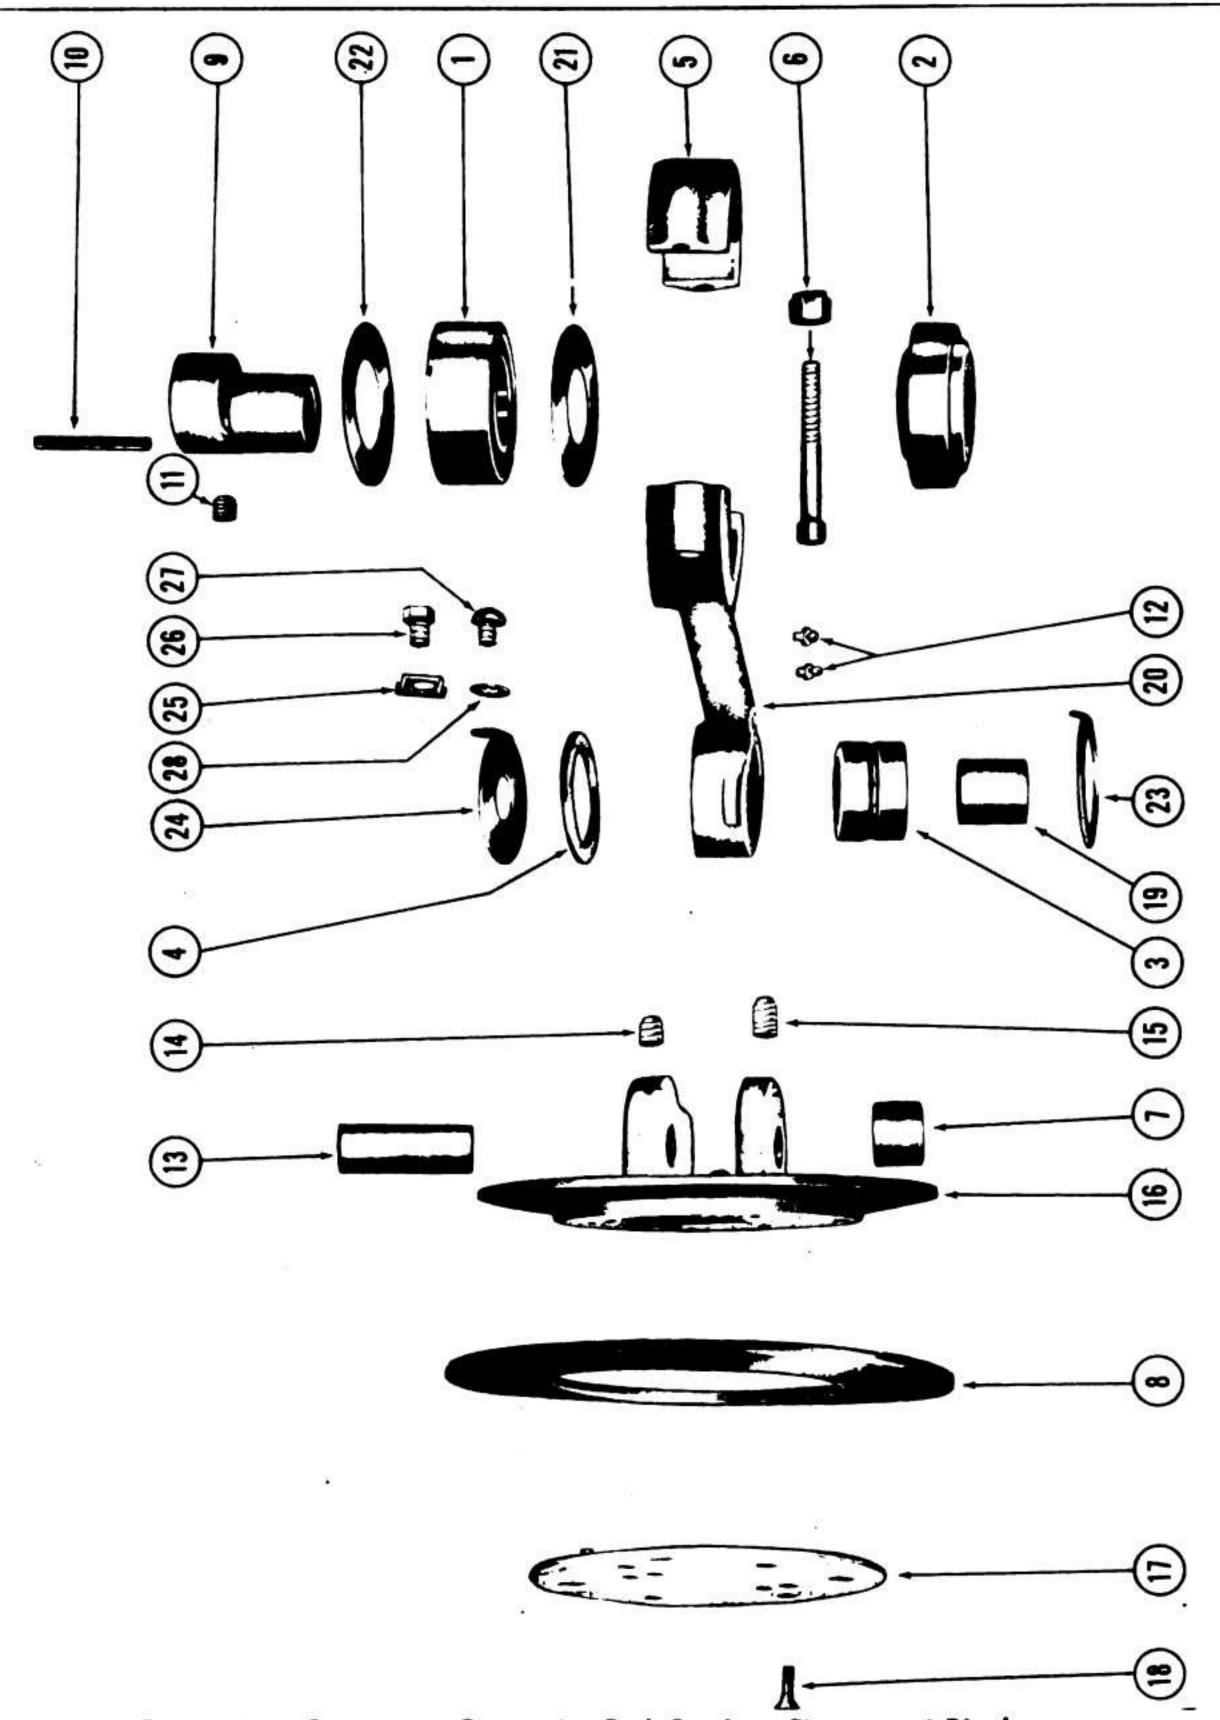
Compressor Connecting Rod, Bearings, Pistons, and Diaphragms
